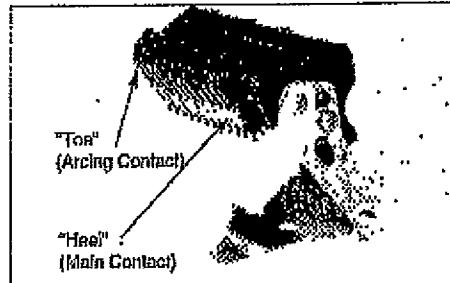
Standard Frame DS (12-Finger) Moving Conductor Assembly
